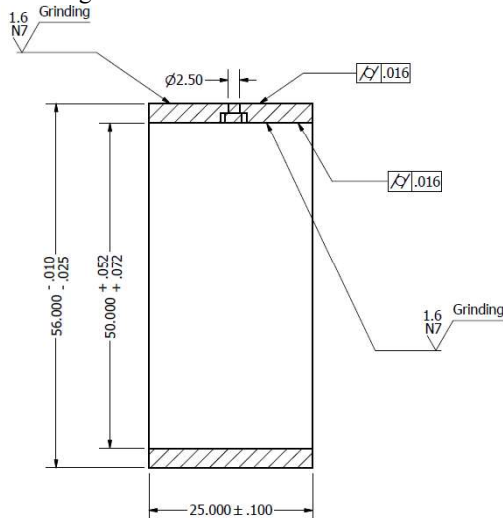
Sectional view of bearing with geometric dimensions and tolerances (All dimensions in mm)
